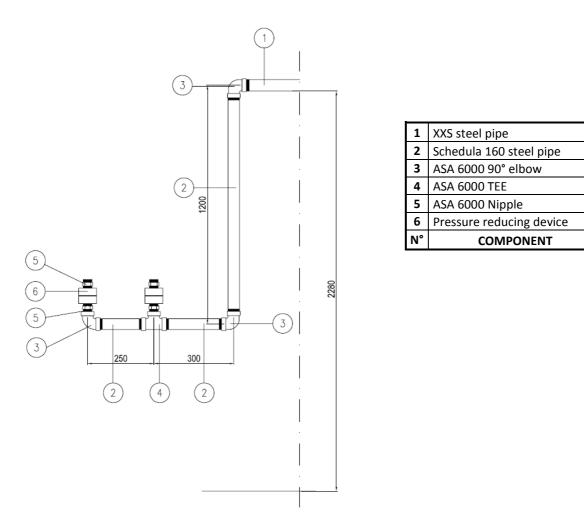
Installation of manifold, restrictors and fittings upward of directional valves
